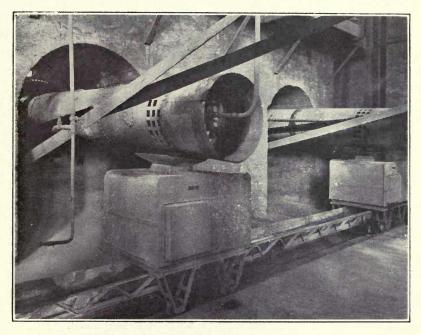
Cooler, Weighing Machine, and Shaking Conveyor.
